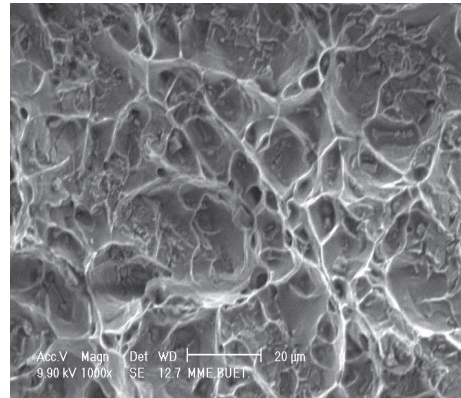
(a). Fractograph of plate 1 (notch at weld portion)
